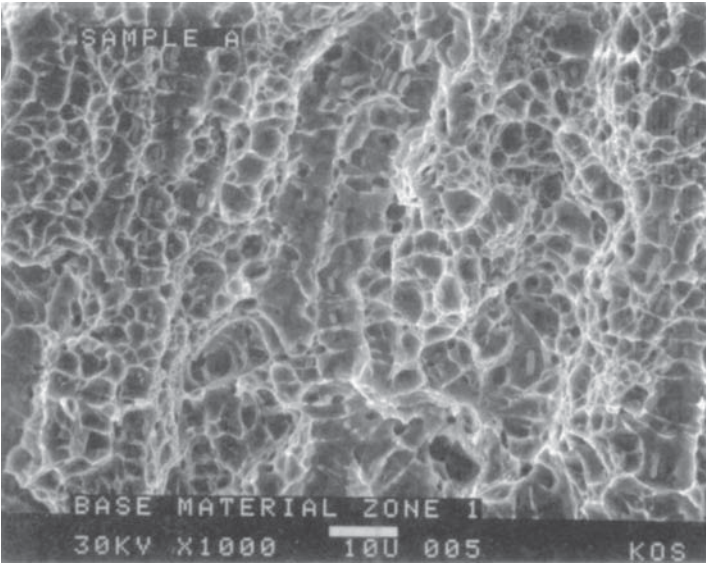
Equiaxed dimples formed during ductile tensile fracture.
